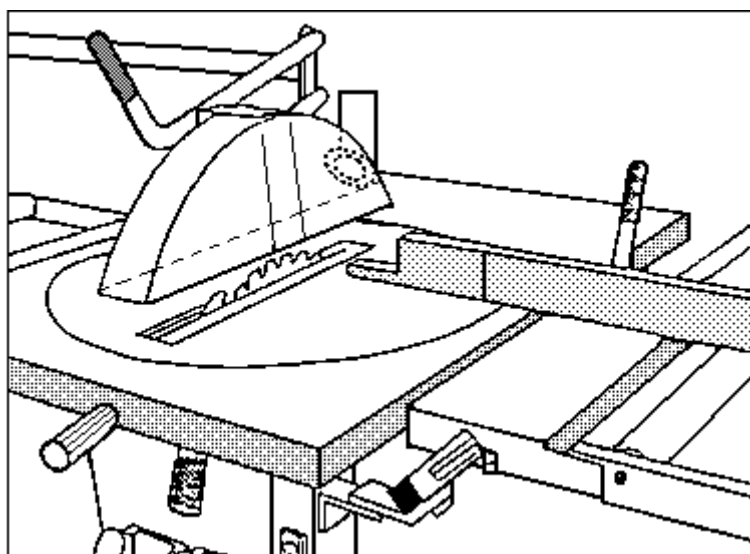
Example of a machine in the cross-cutting mode with moved workpiece
